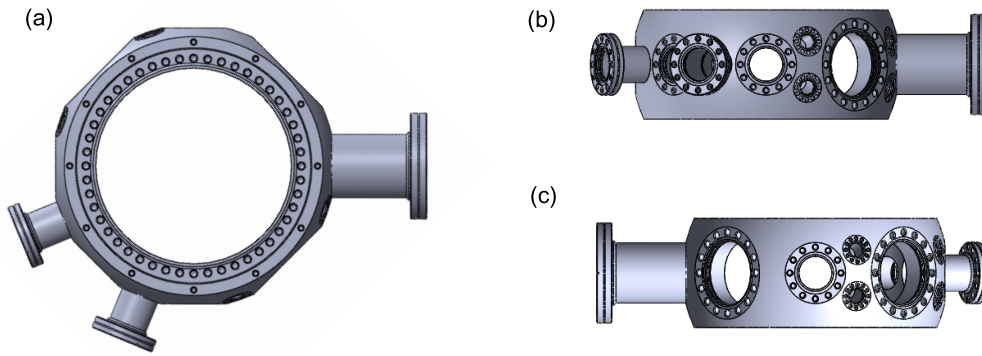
Customized steel science chamber. (a) Top view. (b) Front view. (c) Rear view.
